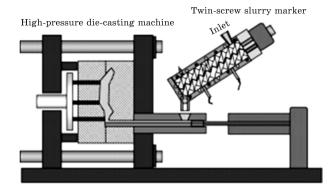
The rheo-die casting process with twin screw to make slurry [74]
